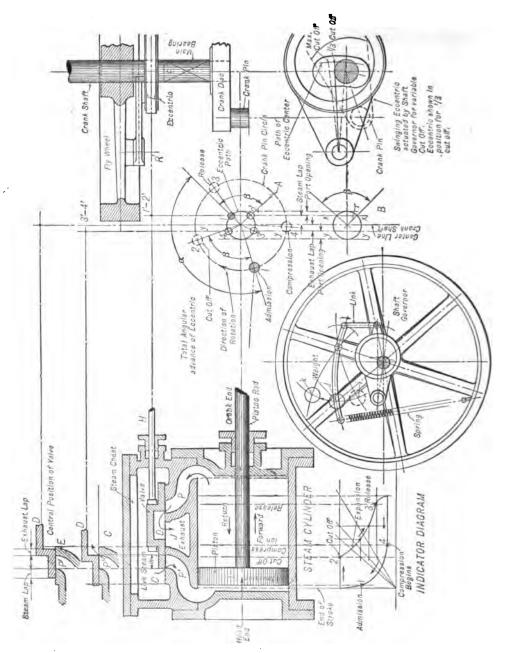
Steam Engine with Automatic Cut Off Gear.
